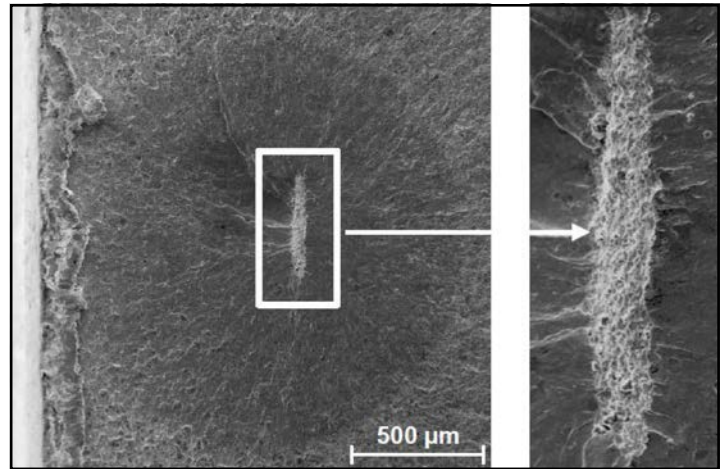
Typical tooth root fracture surface, crack initiation sub-surface on an inclusion (oxide) (Ref. 20).
